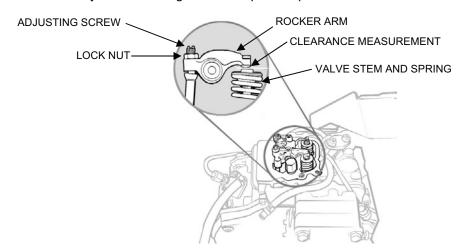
Intake/Exhaust Valve Clearance Adjustment.
